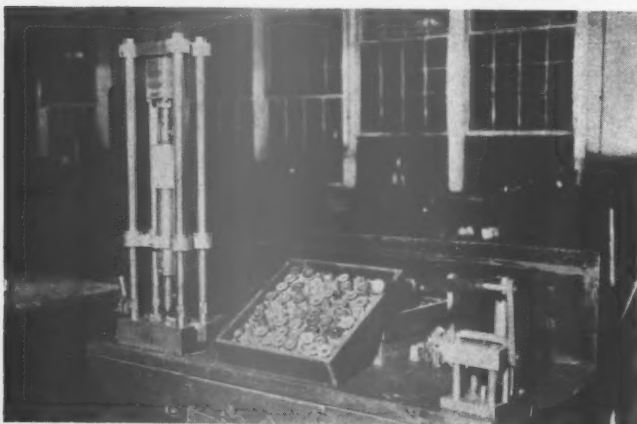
Equipment used in swedging and broaching bad-order check valves
